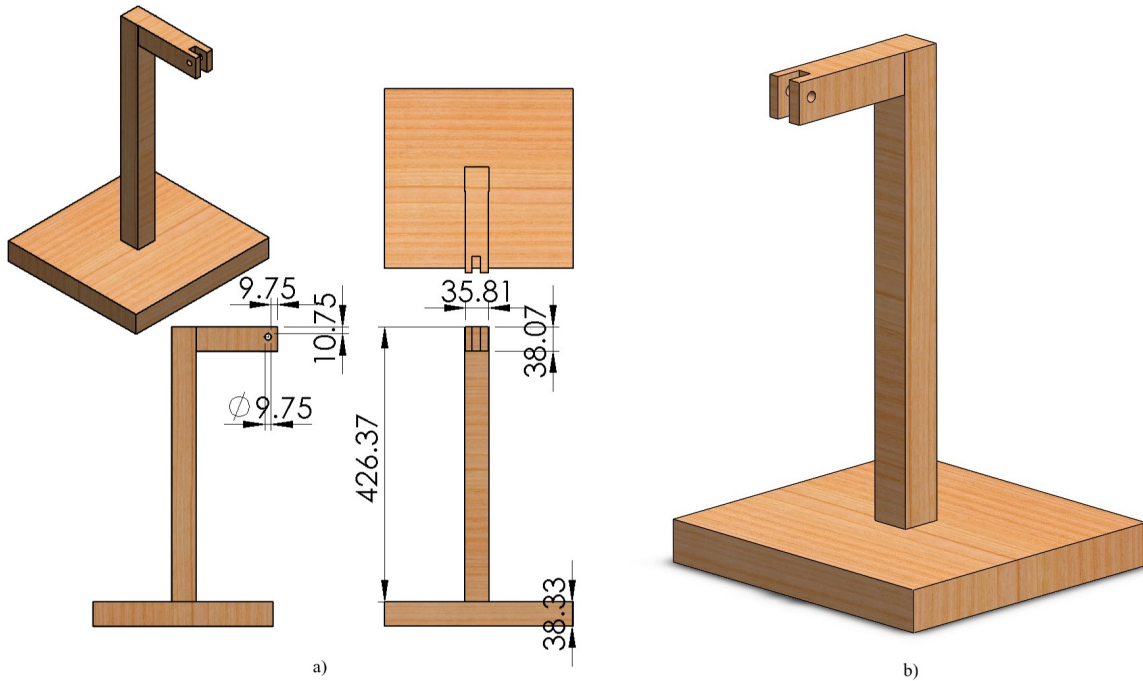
(a) 3 view drawing of the test stand. (b) Isometric drawing of the test stand.
